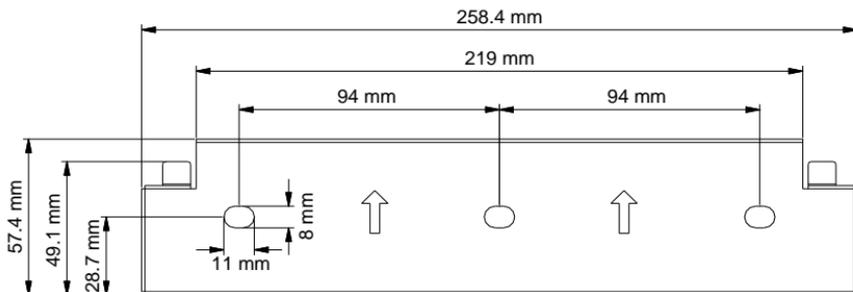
Dimensions of rear panel of R5-(0.7K-3K)-S1-15
